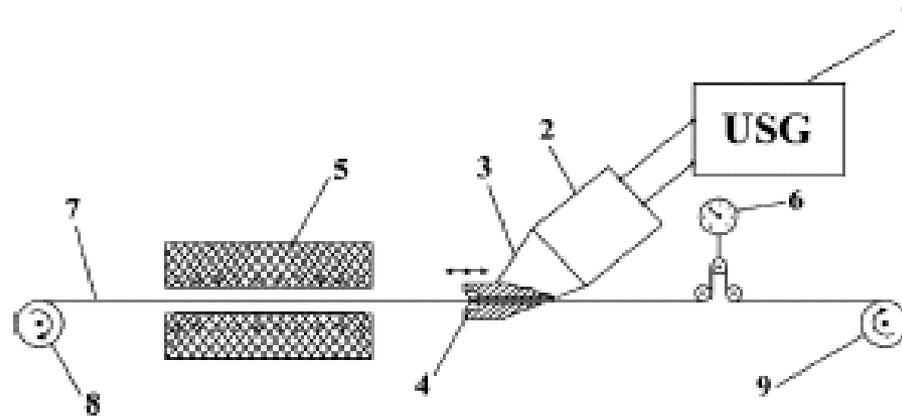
A scheme of apparatus for wire drawing with superimposed ultrasonic vibrations: (1) ultrasonic generator, (2) ultrasonic transducer, (3) ultrasonic horn, (4) die, (5) pusher-type furnace, (6) dynamometer, (7) wire, (8, 9) spools.
